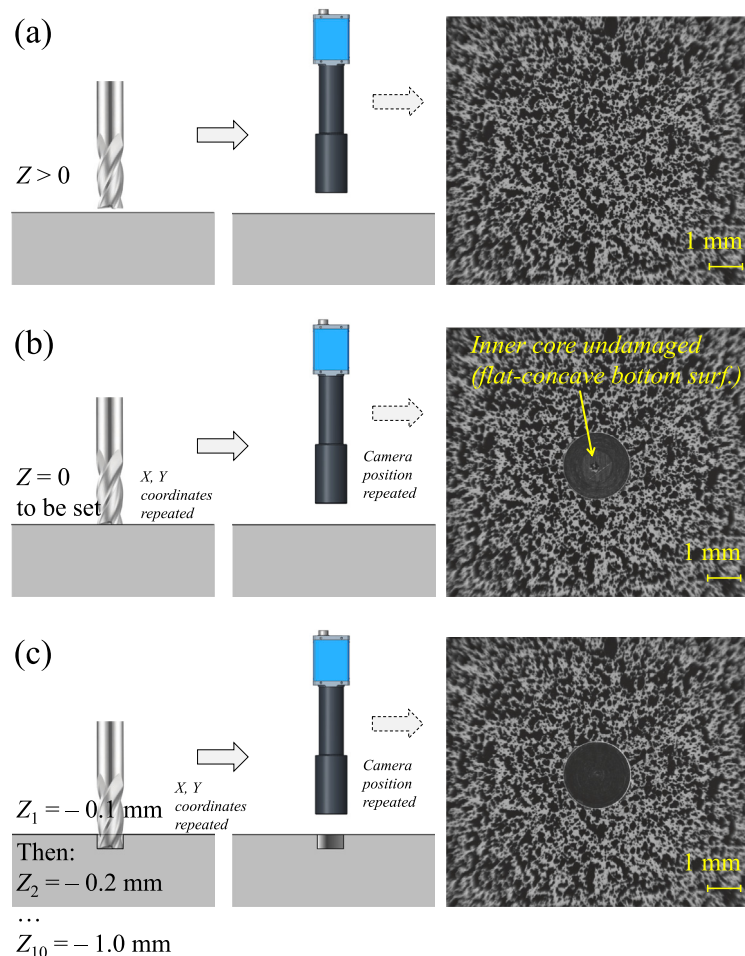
(a) Specimen surface before drilling; (b) Surface after initial contact, showing central point of the hole; (c) Subsequent images at increasing depths.
